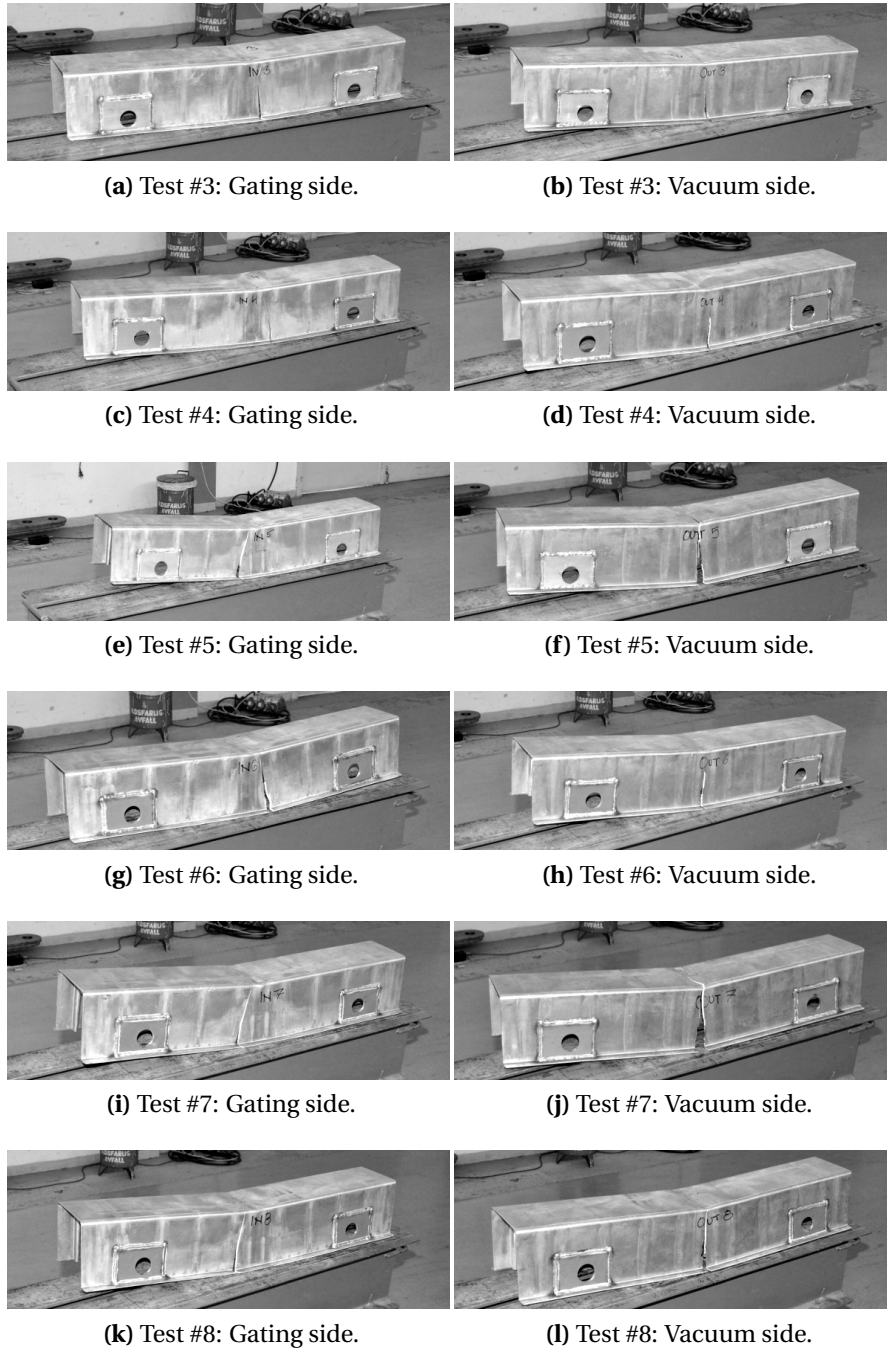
Camera images at first fracture initiation obtained from six parallel three-point bending tests on U900-1 components with focus on gating side and vacuum side: Tests #3 - #5.
